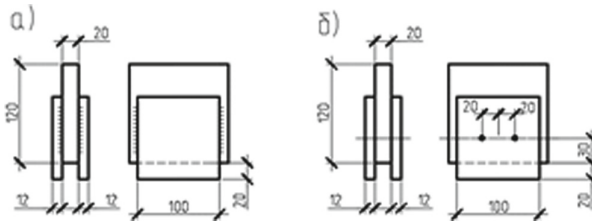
General view of the design of the samples: a) welded sample; b) bolt sample.
